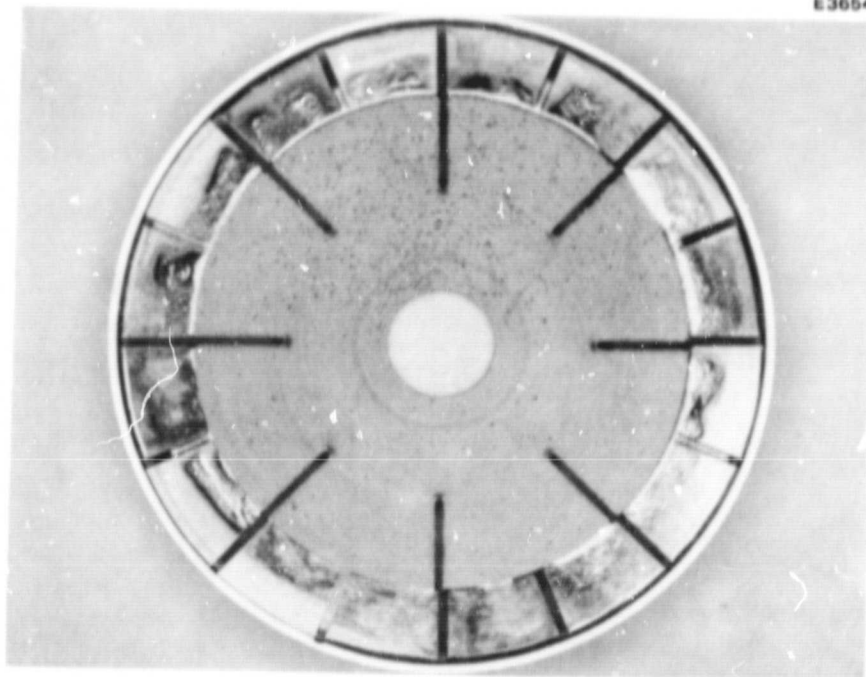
Bottom view of subassembly shown in Figure 3.0-3. Mag. 1.4X.
